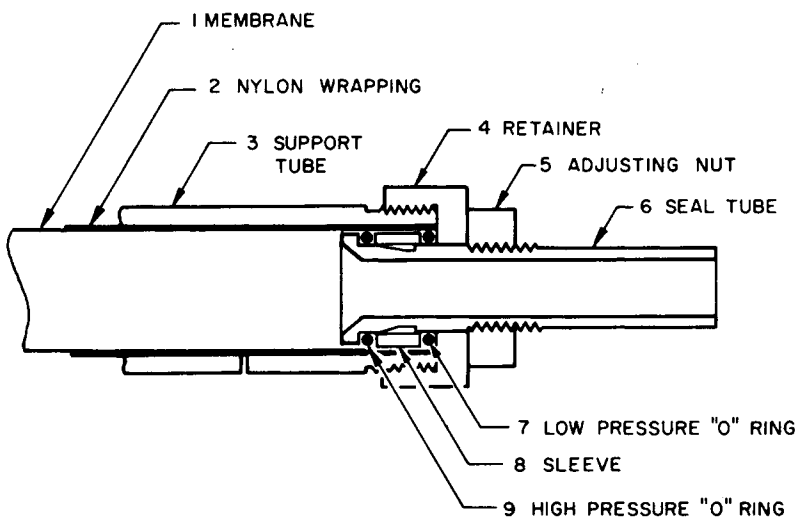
Membrane assembly in tubular reverse osmosis cell.
